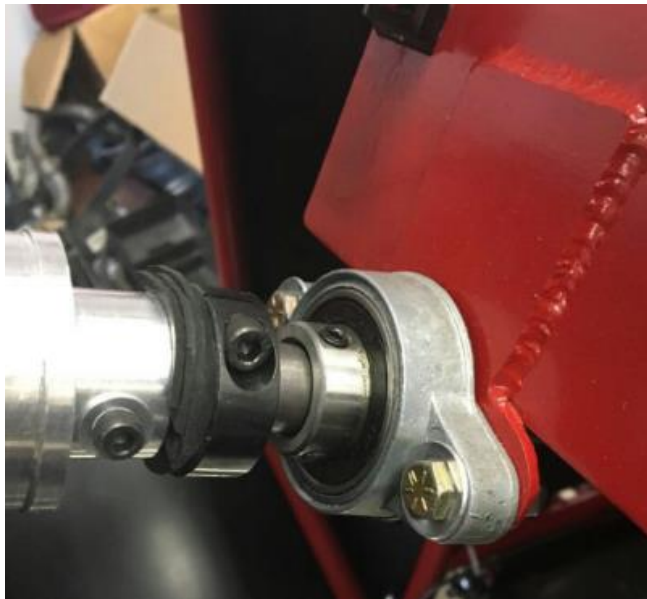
Close Up of Oval Flange Bearing Mounted to Chassis Tab
